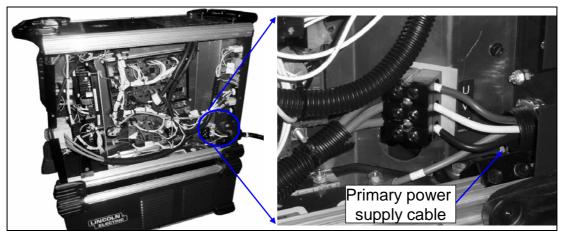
(r) Connection of ROBOWELD iC/H3 (Power Wave R350) (4/4)
